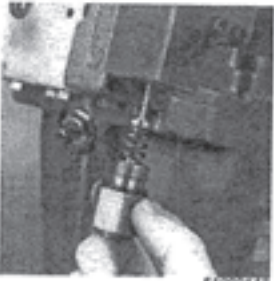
Install PCOR-PC Spring and Spool Valve
